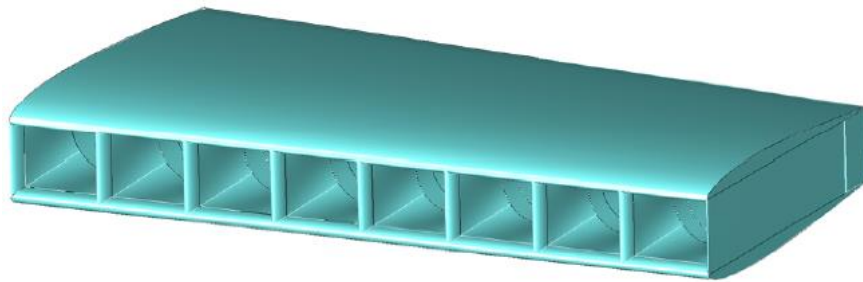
Trimetric View of Inboard Wing Section with airfoil included. ^(11,13)
